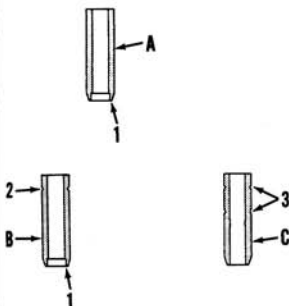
Valve guide (A) incorporates a gas cut (1) and is used on both intake and exhaust valves in 1GM engine. Valve guide (B), with gas cut (1) and single groove (2), is used for exhaust valves in all models except 1GM. Valve guide (C), without gas cut and with two grooves (3), is used for intake valves on all models except 1GM.
